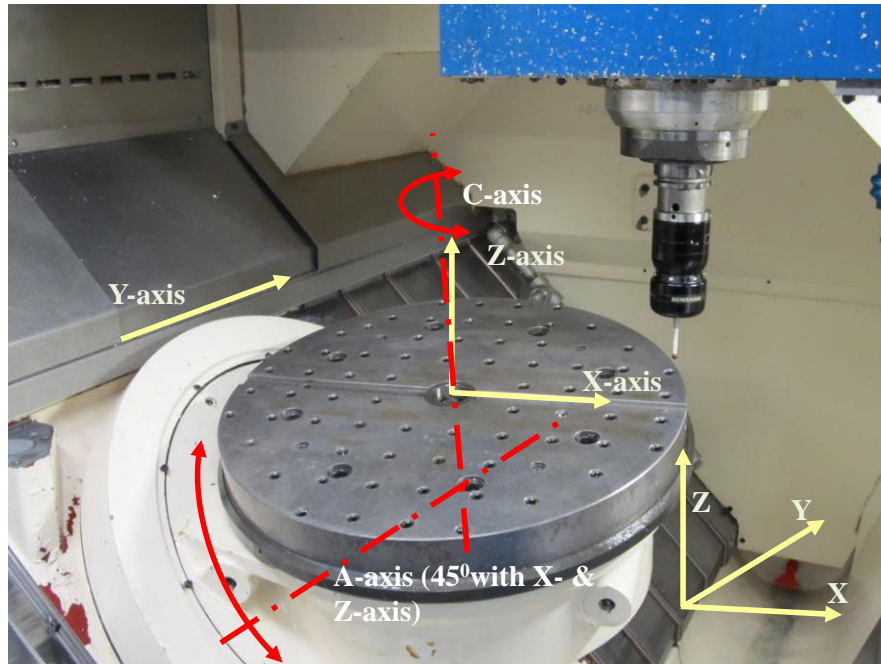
Indigenous artefact probing on the wCAYFXZ(C1)t machine tool (Mayer et al., 2015)
